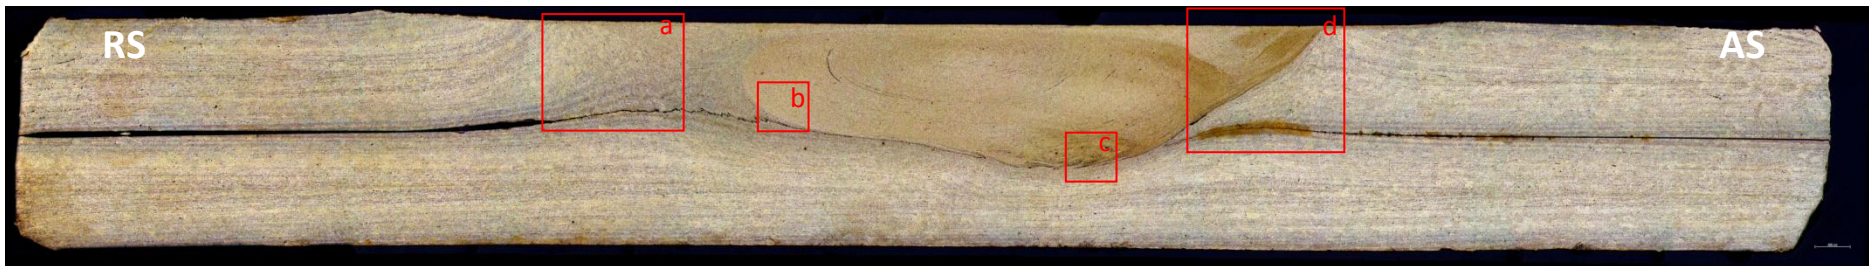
Cross section of aluminium lap jointed by FSW with -1.5 mm PD.
